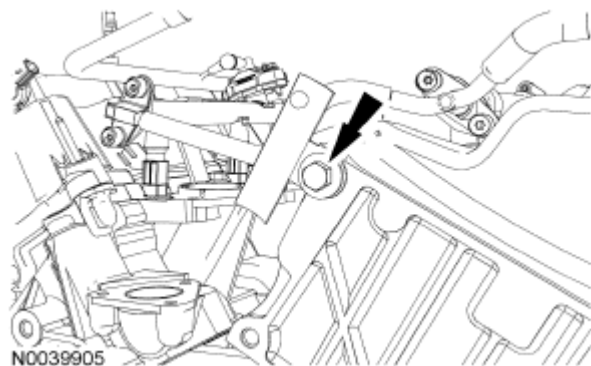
Identifying Engine Wiring Harness Retainer Bolt
